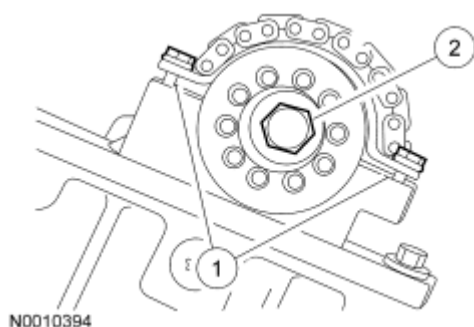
Identifying Camshaft Bolt & Clamp Bolts
